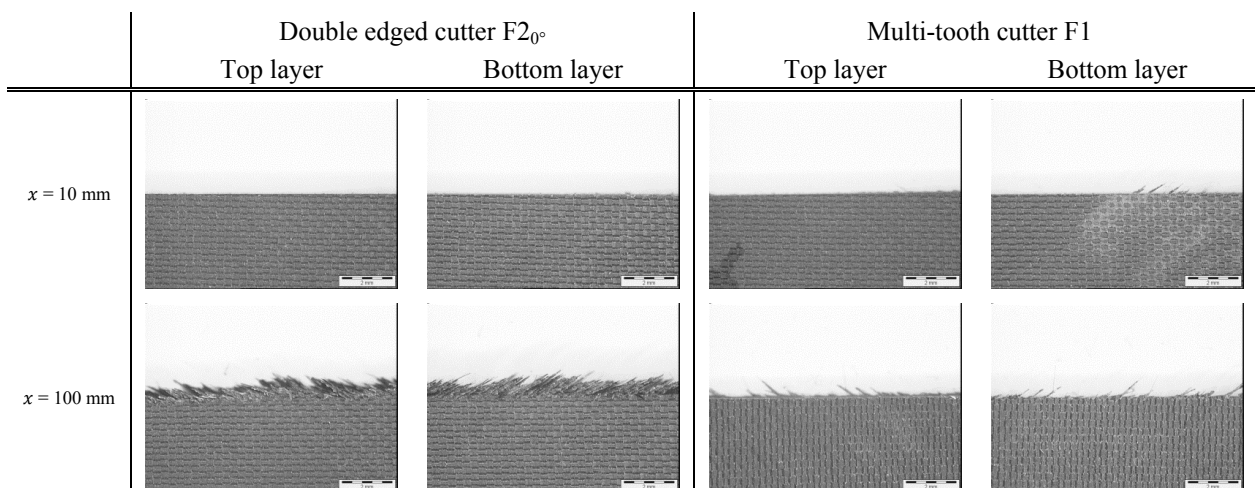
Cutting edge quality at trimming unstable work pieces
